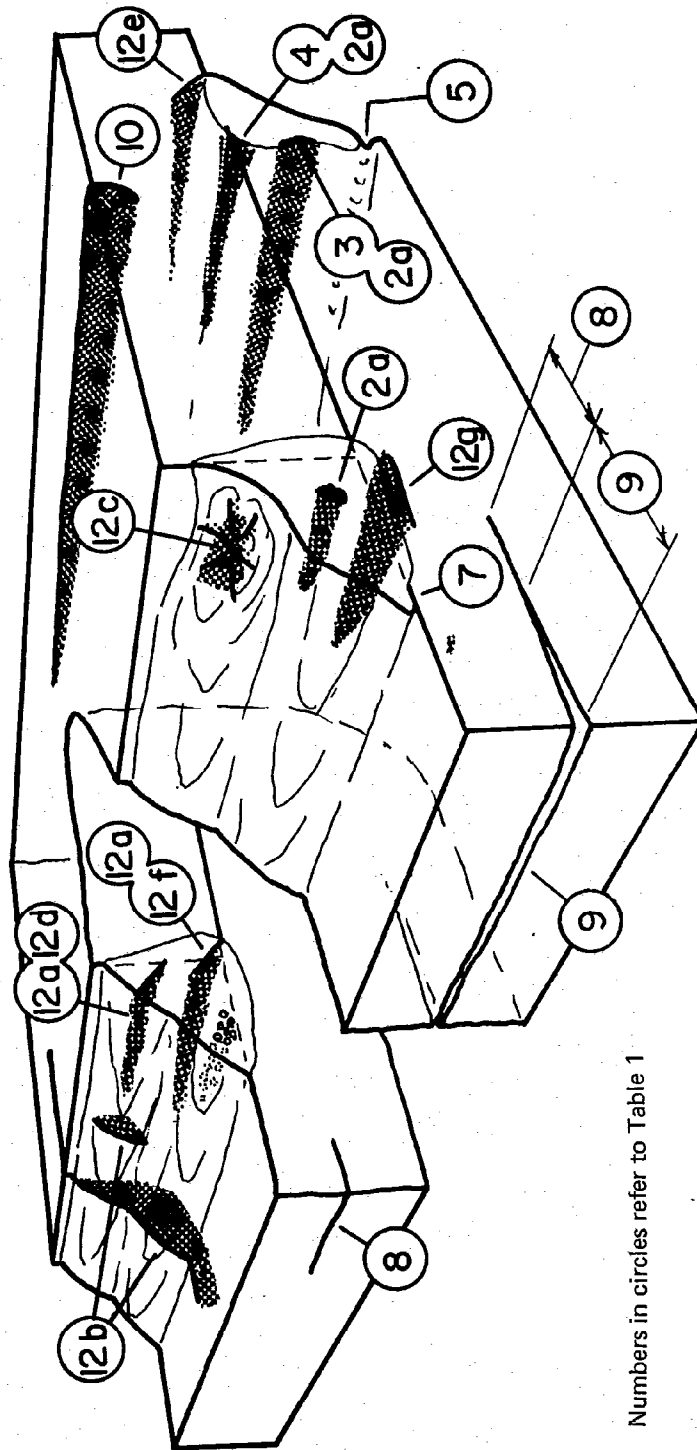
Single bevel groove and fillet welds in corner joint
